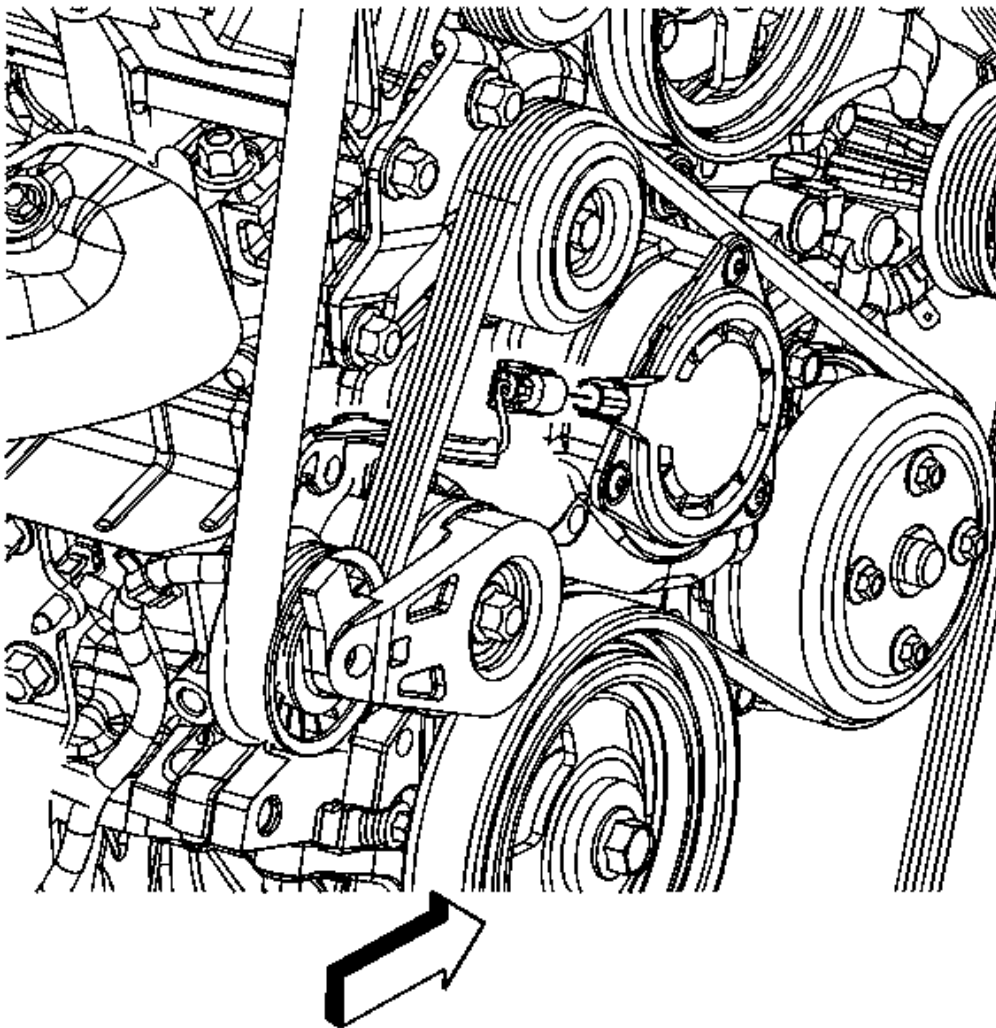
Camshaft Position Actuator Magnet Electrical Connector
